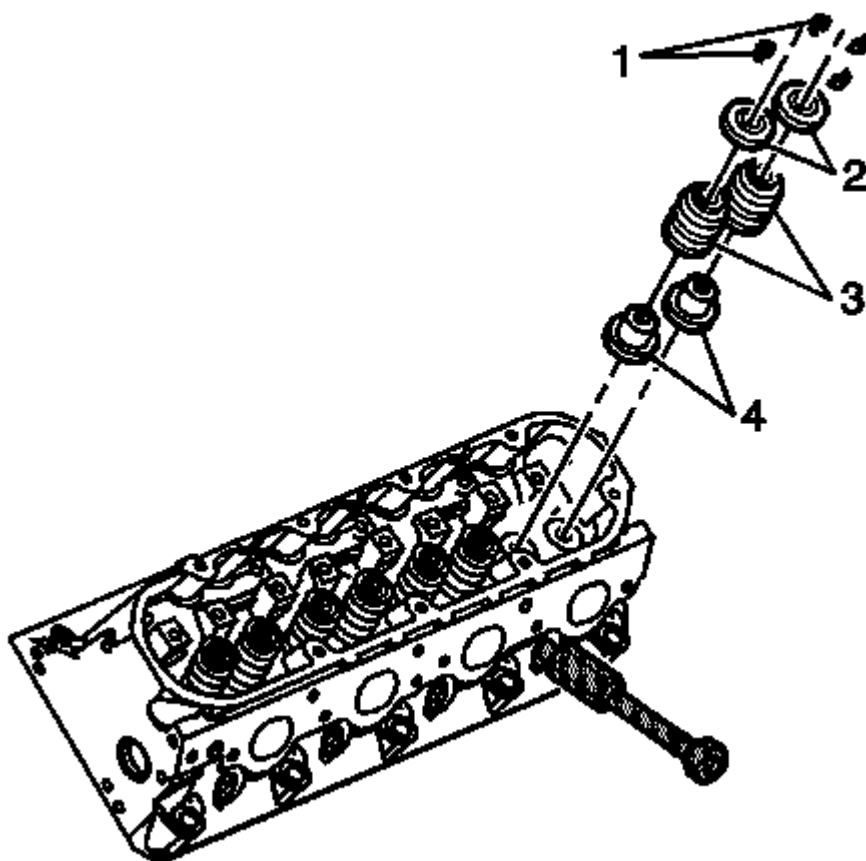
Valve Stem Keys, Spring, Cap & Shim
